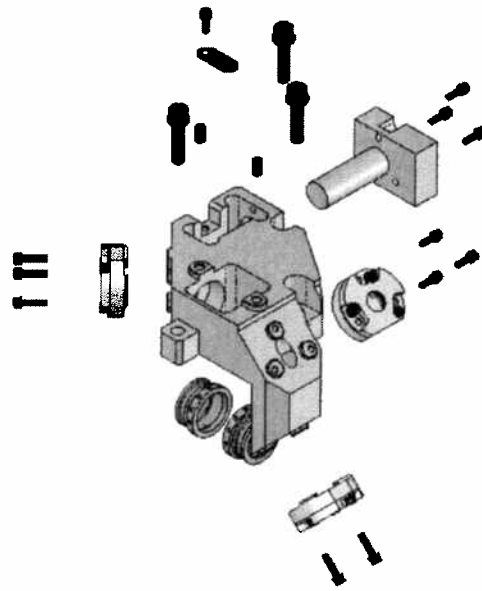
Exploded vies of assembly (see Drawing DP-01 for detailed assembly drawing)
